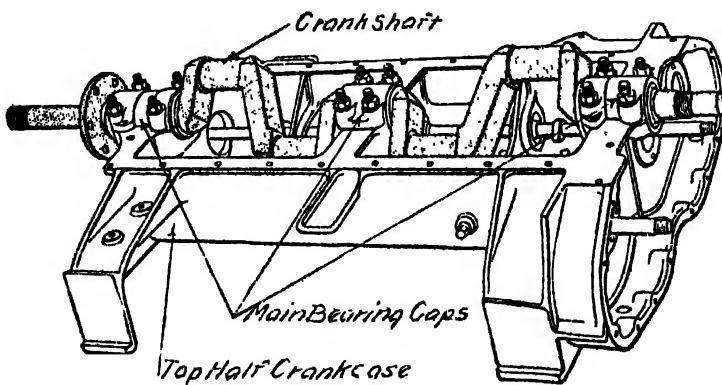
Top Half of Crankcase Showing Method of Crankshaft Retention by Three Main Bearing Caps.
